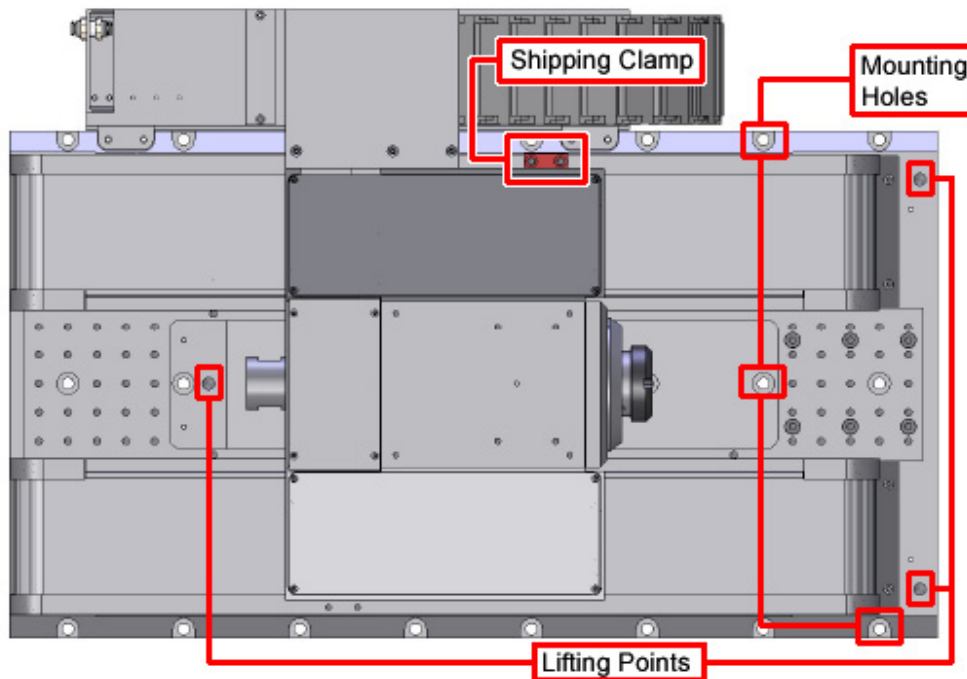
VascuLathe[®]-ACS Stage Showing Mounting Holes (Top View)
